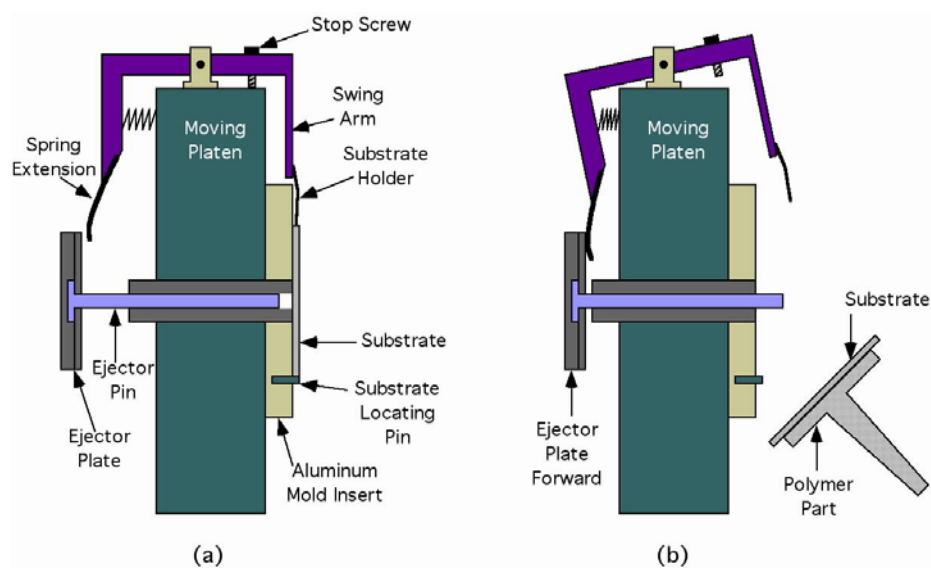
Side View of Mold with Substrate Holding Mechanism Shown (a) Holding the Substrate and (b) Ejecting the Co-Molded Part
